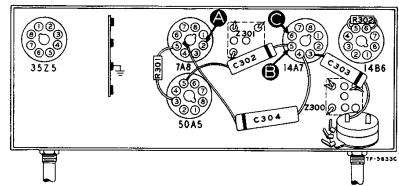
BOTTOM VIEW, SHOWING SECTION 3 TEST POINTS
